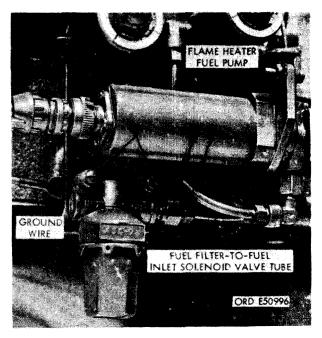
REMOVING OR INSTALLING FLAME HEATER FUEL FILTER ASSEMBLY.
